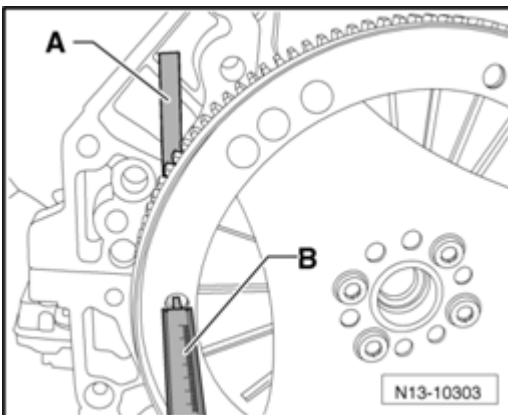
Positioning Straight Edge On Transmission Bolting Flange & Using Caliper Gauge To Measure Against Straight Edge Through Converter Mounting Holes
